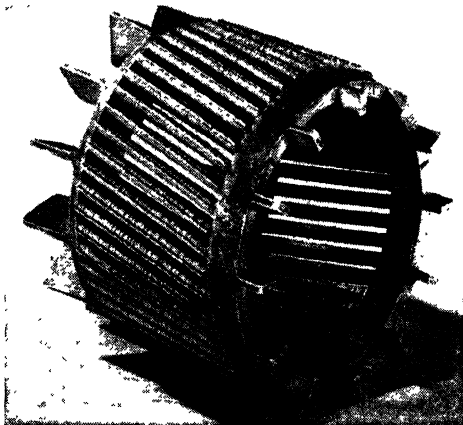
Squirrel-Cage Winding for Induction Motor. This element was originally cast into a laminated steel core, which was then dissolved away.
